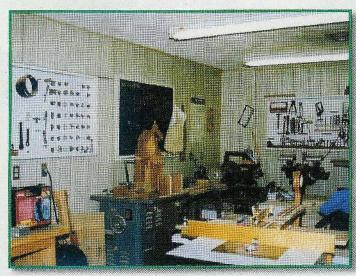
More of Ira's machine tools and storage areas for various hand tools.
